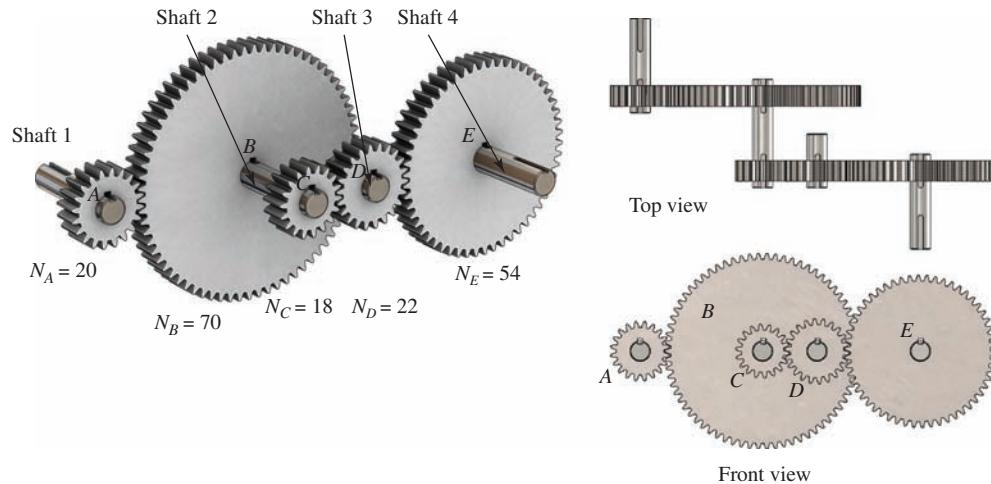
Double-reduction gear train with an idler. Gear D is an idler
